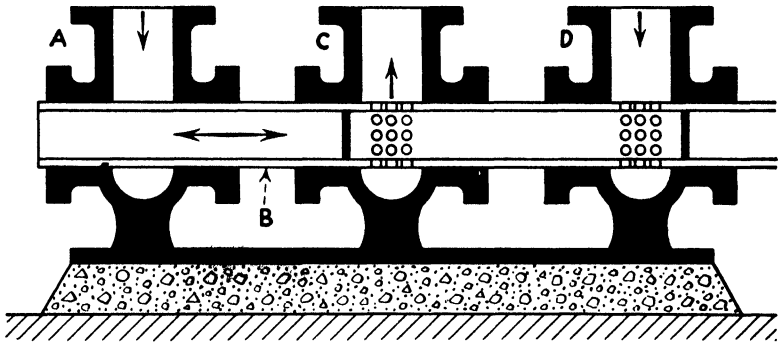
Sliding-tube valve delivers liquid from either of two sources to a common outlet.
